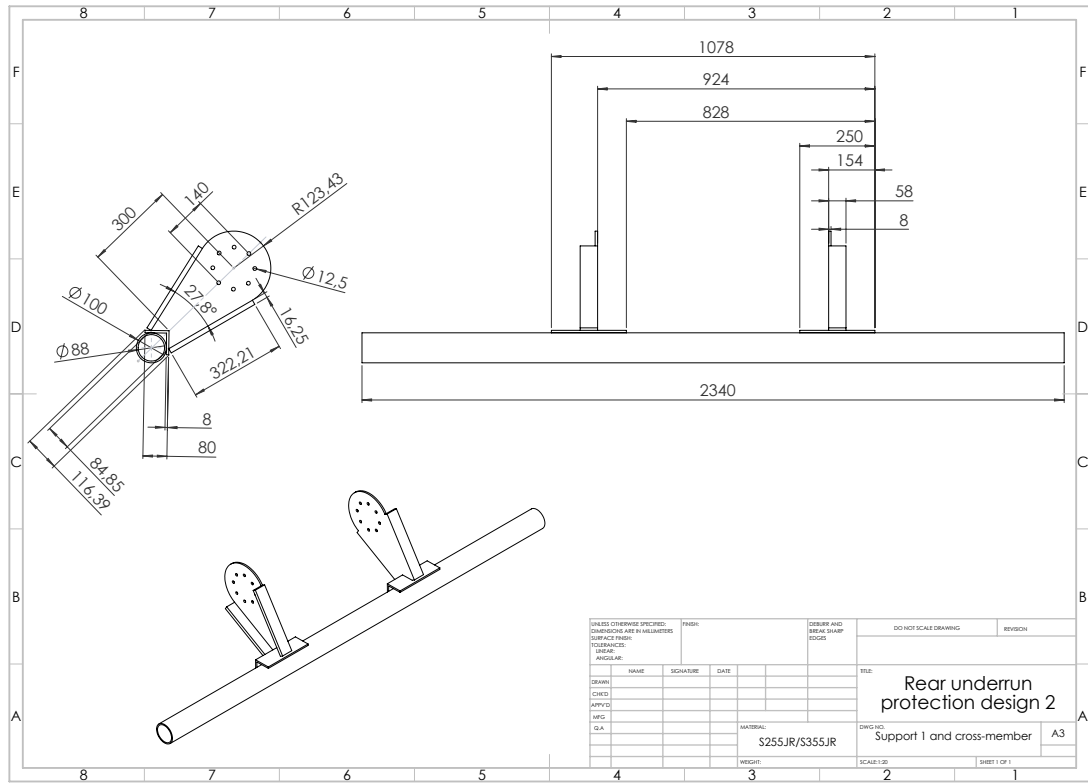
Technical drawing of the support 1 and the cross-member, with their respective dimensions
